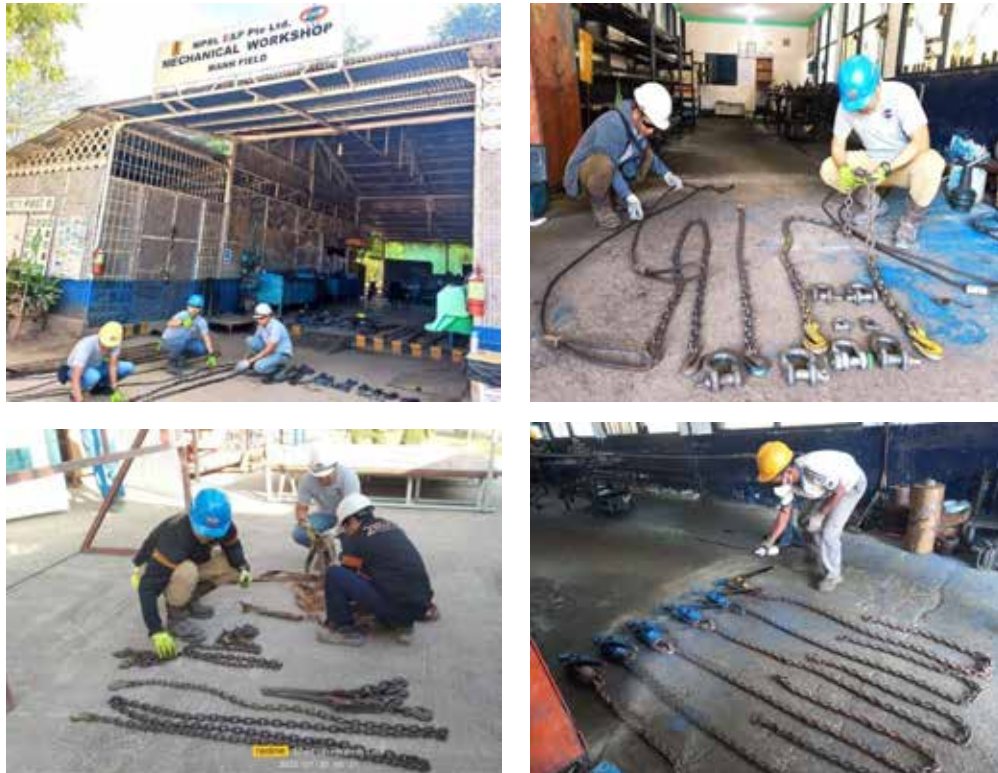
Lifting Gear, Hoisting & Handling Equipment Inspection and Colour Coding
